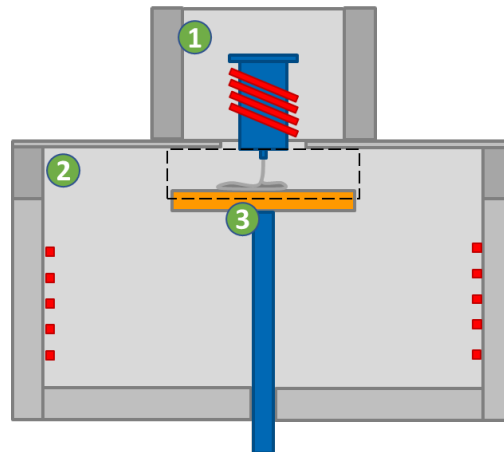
Components of the printer's concept. (1) Print head, (2) Annealing chamber, (3) Printing platform.
